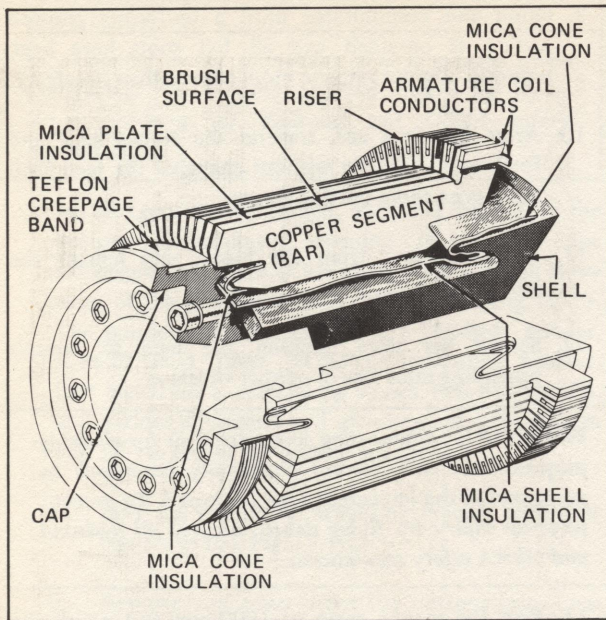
CUTAWAY SECTION OF THE COMMUTATOR.
